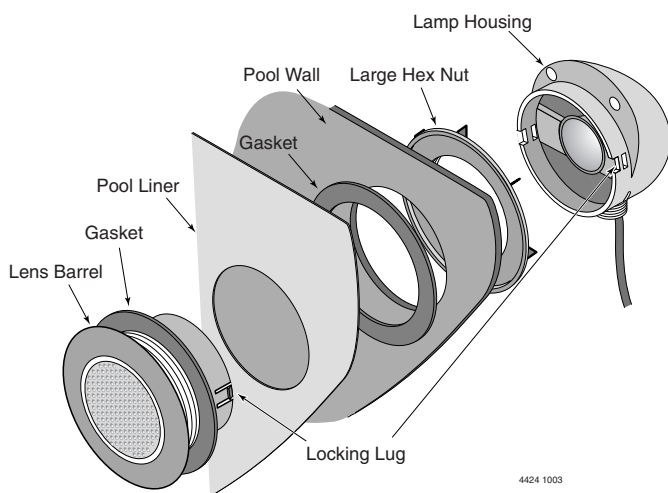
Light and Gasket Assembly Order - Not To Scale
